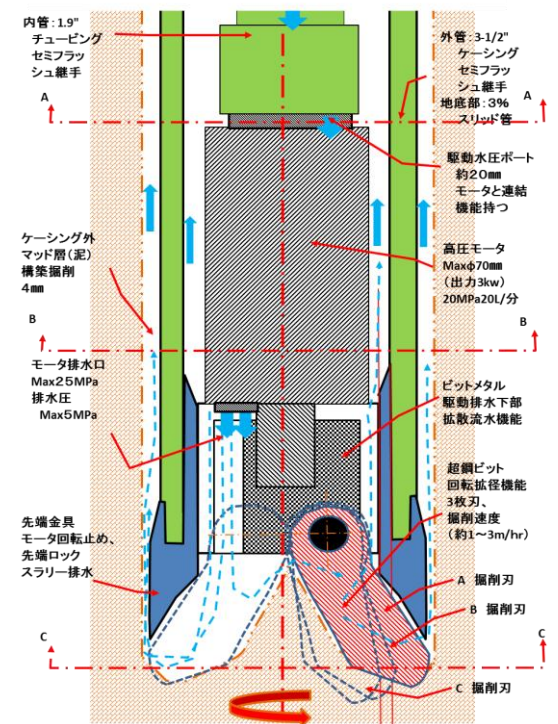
Hydraulically driven high-speed drilling bit drilling
